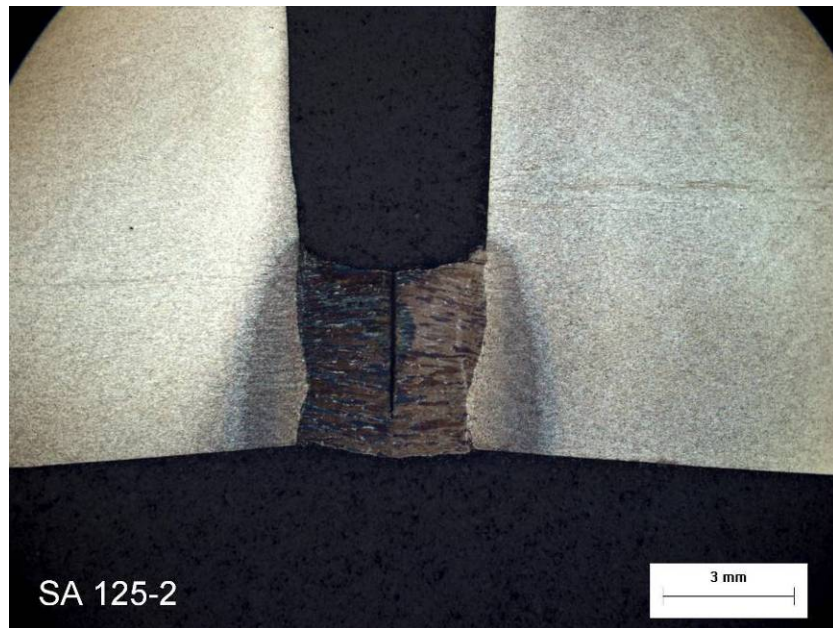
Macrosection of Weld SA-125 Made with ER80S-D2 Wire in X80 Pipe in the Vertical-Down Position Showing a Buried Solidification Crack (Wire feed speed ratio: 11.6, travel speed: 1.2 m/min, throat thickness: 4 mm, magnification: 7×.)
